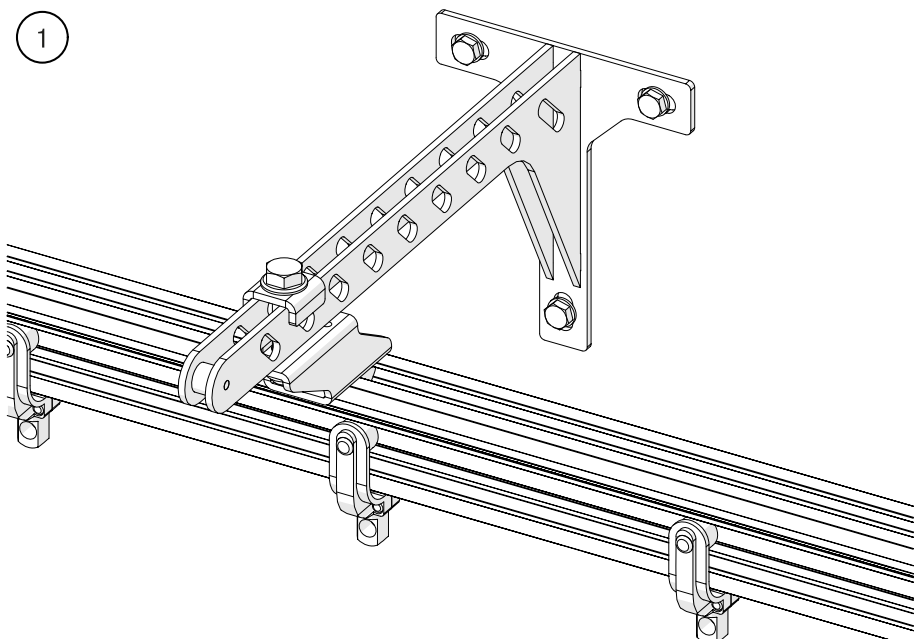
BELT-TRACK – Wall mount bracket on suspension
